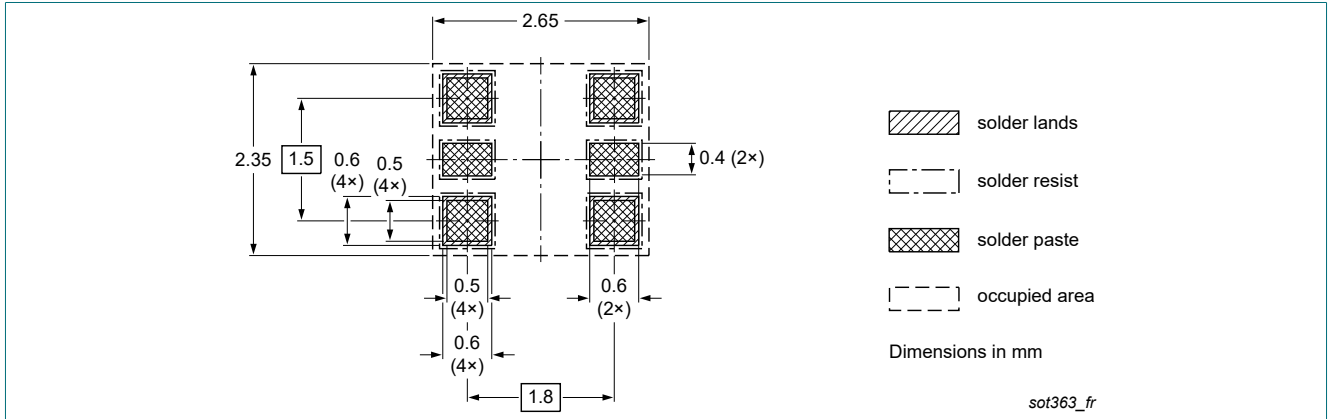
Reflow soldering footprint for TSSOP6 (SOT363)
